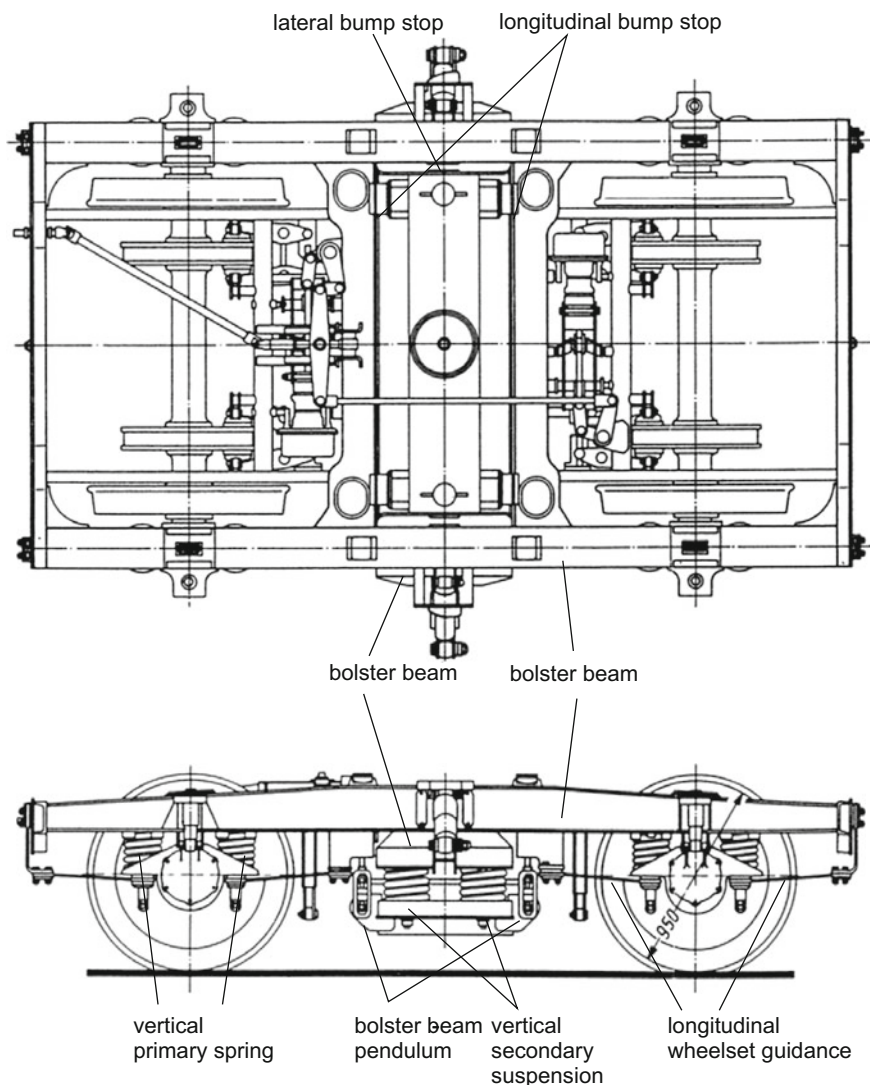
Passenger coach bogie with two wheelsets, type Minden–Deutz with disk brake (MD 36), from [1]
